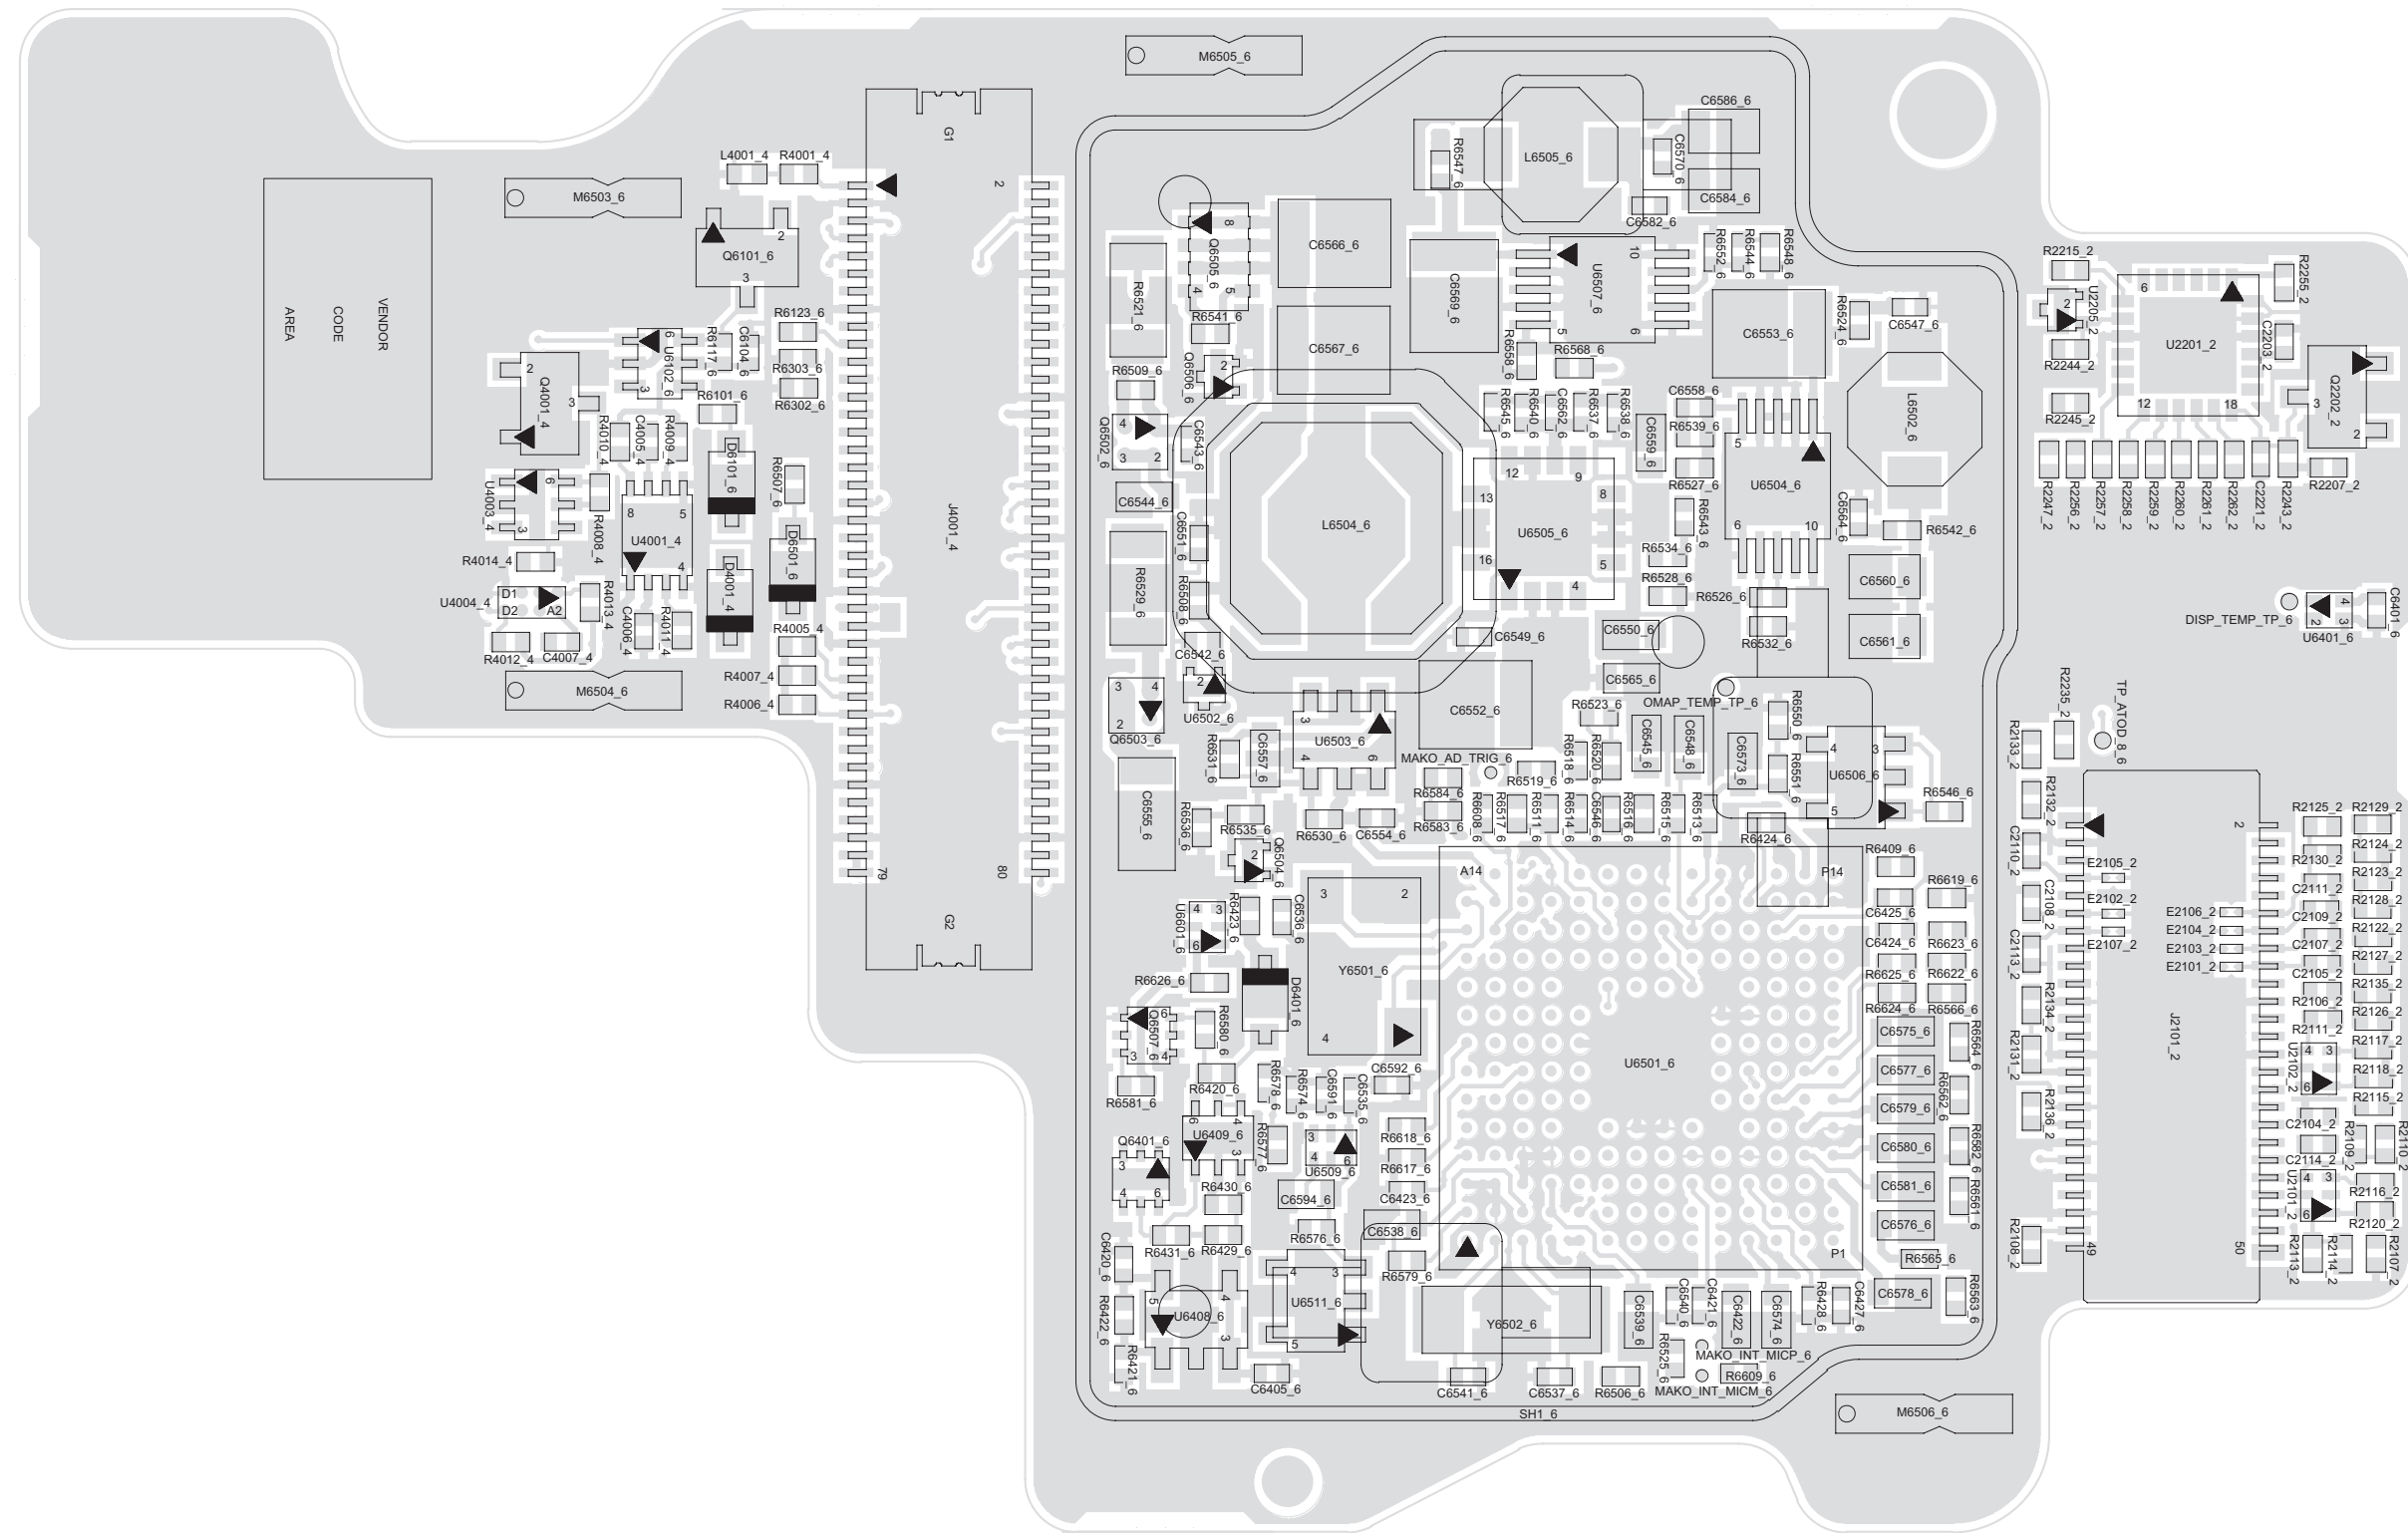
HLN5960A Controller Board Layout – Side 2
